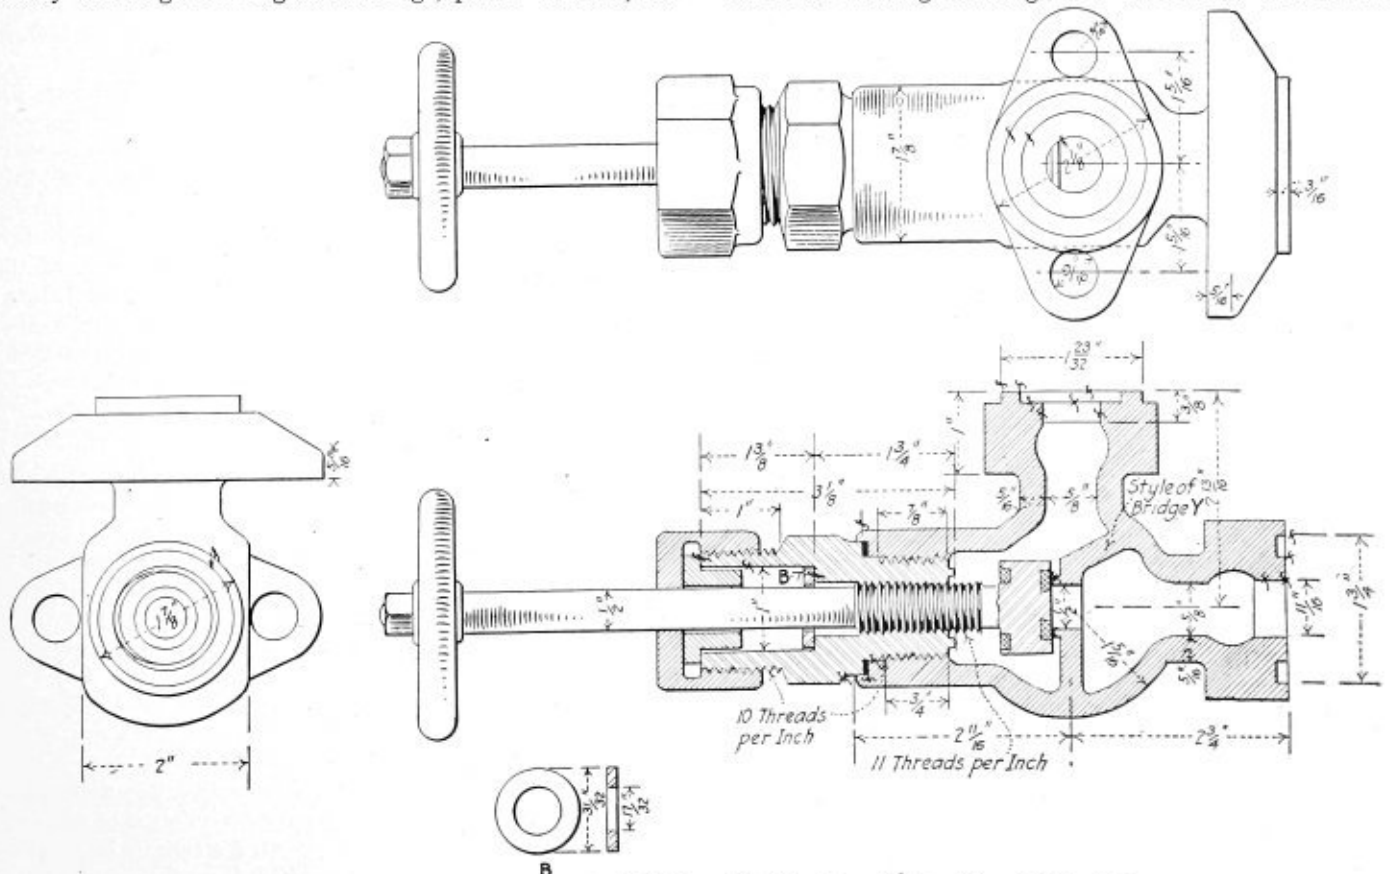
Y-Pattern of Ammonia Angle Valve. Working Drawing for 3/8 and 1/2 Inch Sizes
